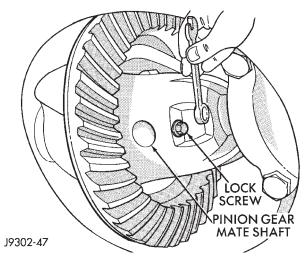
Pinion Gear Mate Shaft Lock Screw
